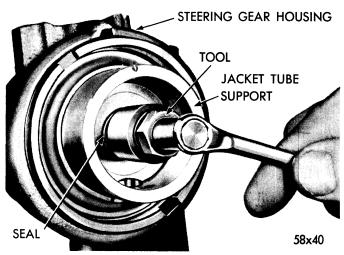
Removing Worm Shaft Upper Oil Seal With Tool C-3638
